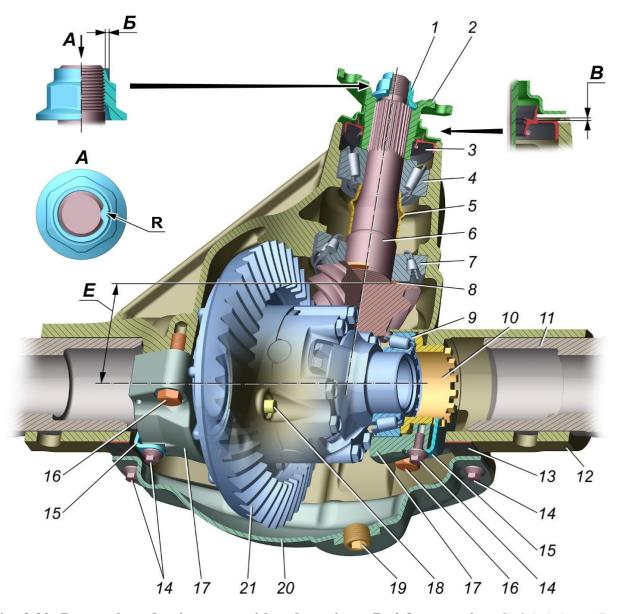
Rear axle reduction gear with axle casings: B=0.8 mm, min.; C=0.9-1.5mm; R = 1.2mm, min.; 1 - nut; 2 - drive gear flange; 3 - collar seal; 4, 7, 9 - bearings; 5 - spacer bushing; 6 - drive gear; 8 - adjustment ring; 10 - differential bearing nut; 11 - axle casing; 12 - rear axle housing; 13 - gasket; 14, 16 - bolts; 15 - retainer plate; 17 - differential bearing cover; 18 - oil drain magnetic plug; 19 - oil fill plug; 20 - housing cover; 21 - differential with driven gear.
